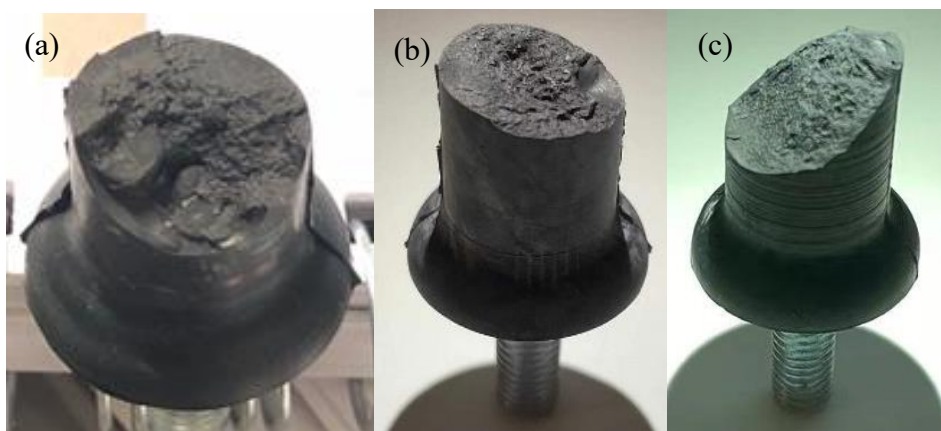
Side view of the fracture surface of a sample at (a) 20 °C, (b) 50 °C, and (c) 80 °C.
